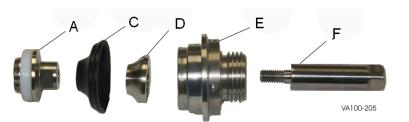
Diaphragm and Valve Assembly for 11/2 inch Valves
